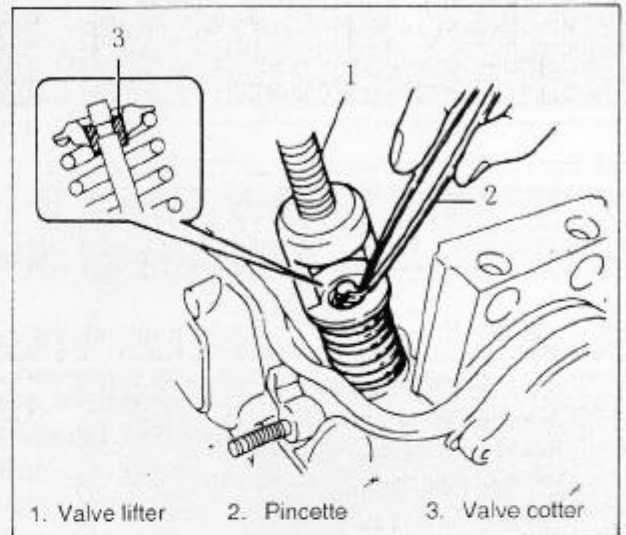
A - 70 INSERTION OF VALVE COTTERS
